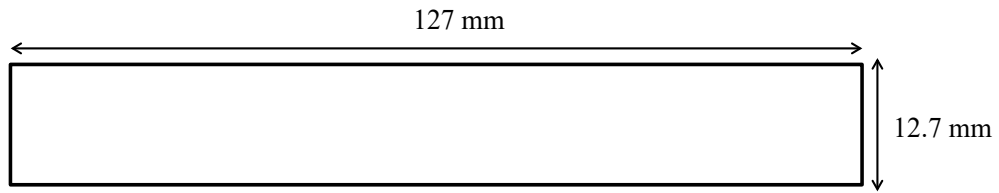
The ASTM (D790)-based dimensions of the flexural test specimen
